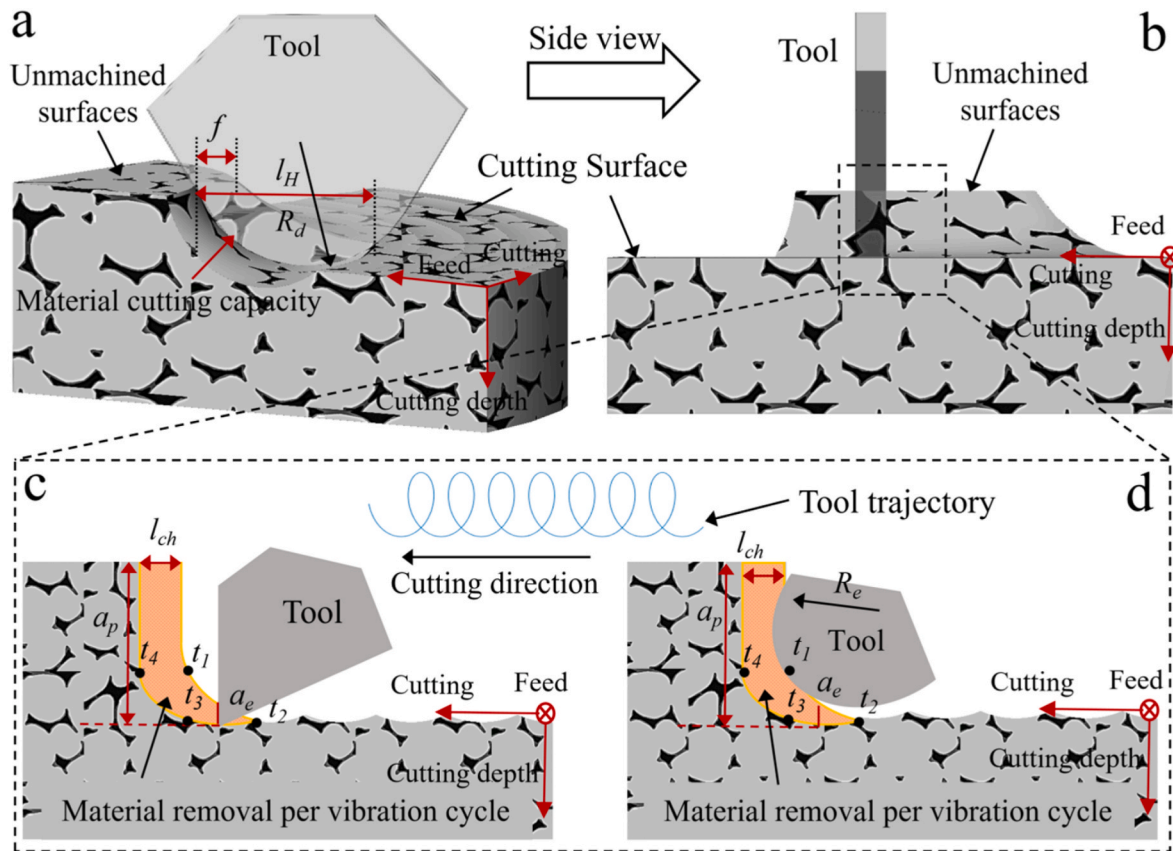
Material removal process of different tools in UEVC: (a) Machining principle of UEVC; (b) Material removal for ideal tool, (c) Material removal for cemented carbide tools.
